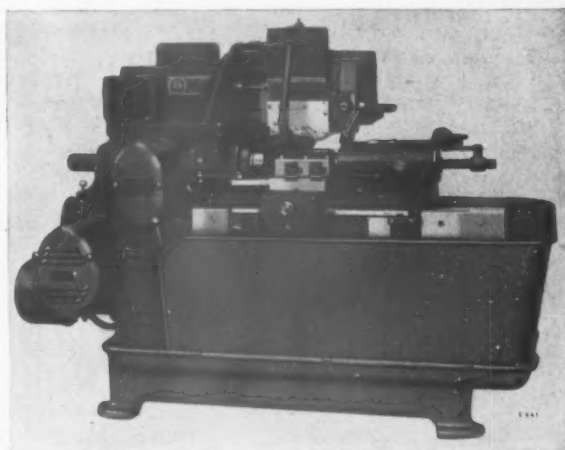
Sundstrand Automatic 10" Stub Lathe with overhead auxiliary slide and tooling for stepping up production of gear blanks.
